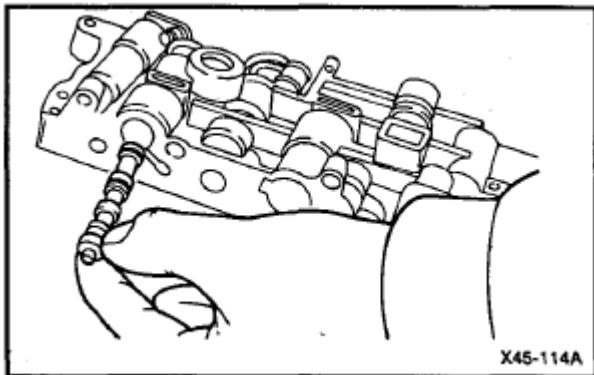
Removing/Installing Rear Clutch Exhaust Spring & Rear Clutch Exhaust Valves
